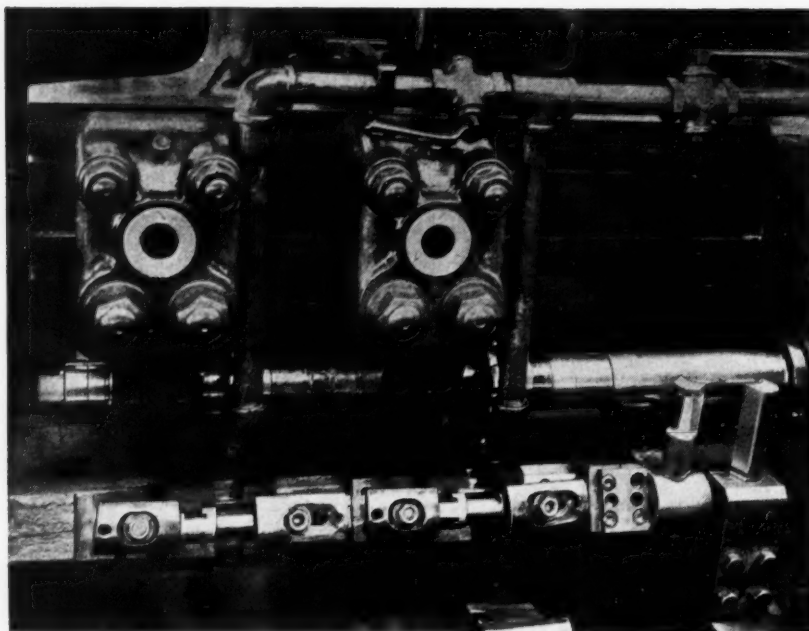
Milling Port Surface of Impulse Blades to a Curve Bounded by Two Tangents. A Blank and a Finished Piece are Shown at the Right of the Fixture
